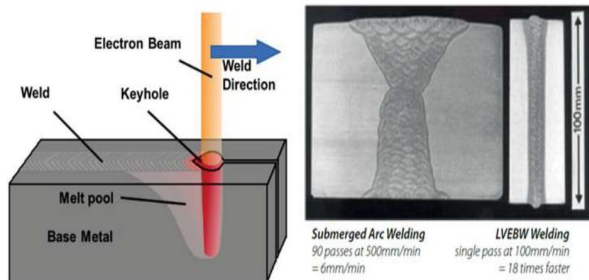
EBW keyhole weld and weld cross-section (compared to Submerged Arc Welding)
